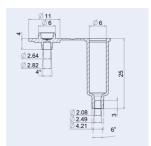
Detail drawing of tank Fluidic 639 with Luer interface and cap
